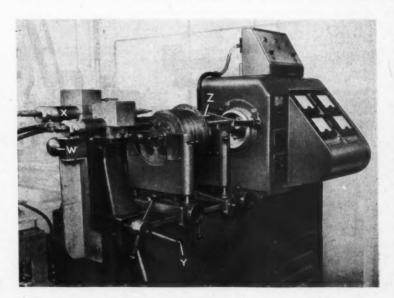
Rotor units are dynamically balanced on the specially-equipped Jackson & Bradwell machine here shown. After the balance has been checked, the necessary correction holes are drilled in the end face and the flange by means of the Par-A-Matic air-operated units
